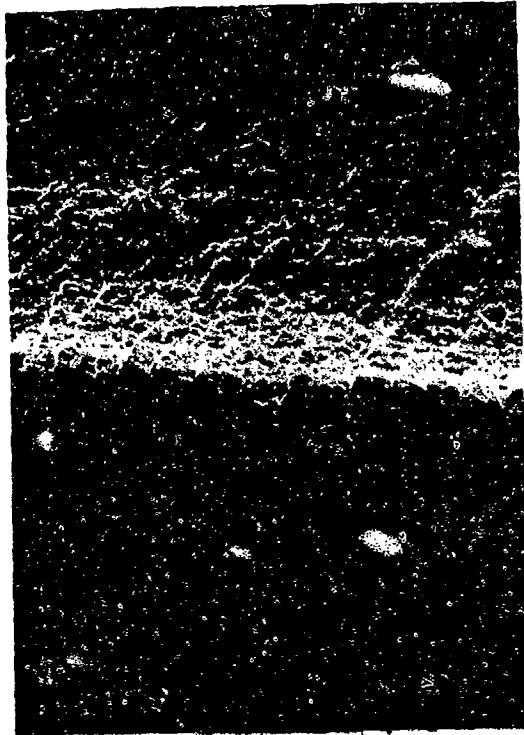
Overall photograph of the fracture surface. The thumbnail is clearly visible indicating propagation from origins in the bolt head contact circle.
